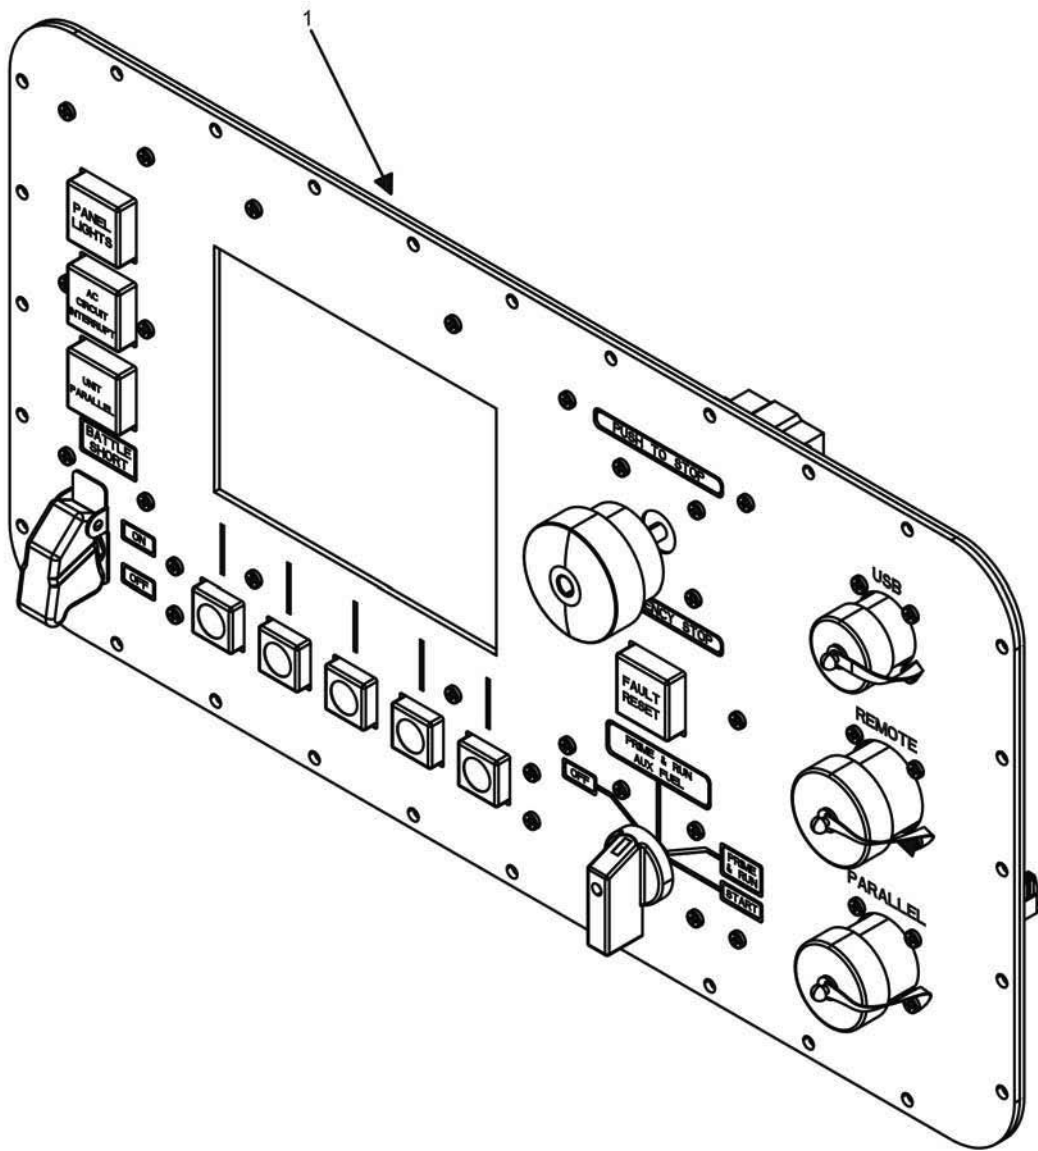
DCS Control Panel Assembly (Sheet 1 of 6).
